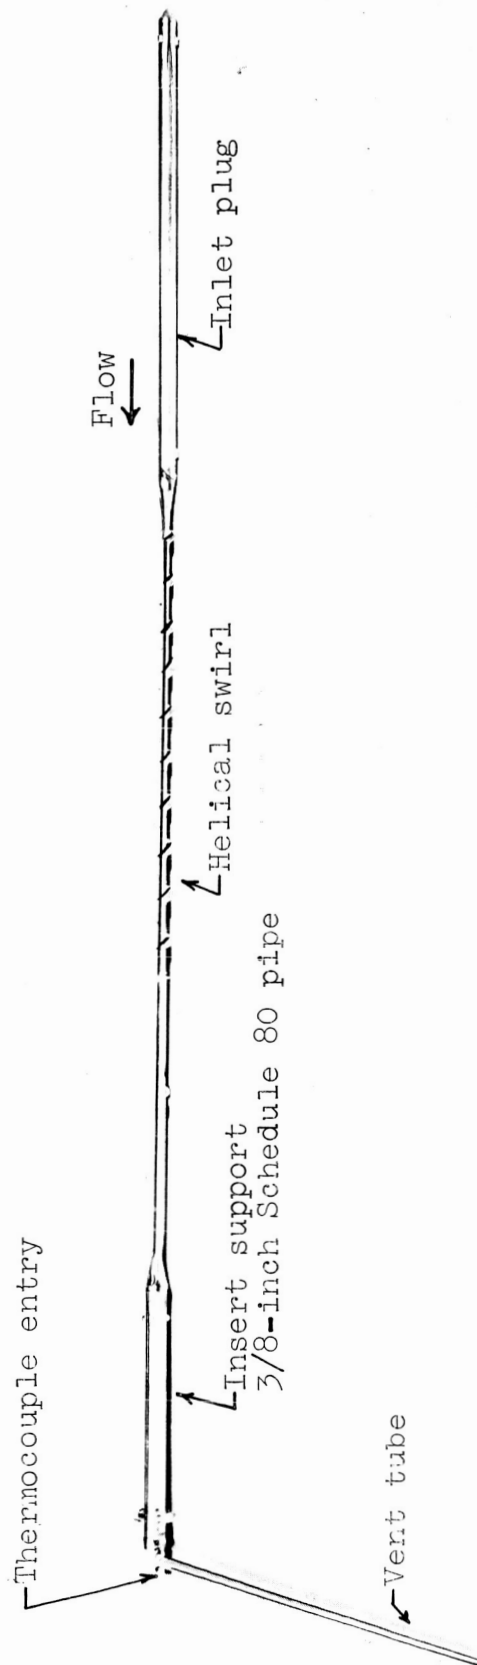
Cb-1Zr Helical-Plug Insert for Test Section No. 4, 100 KW Loop.
